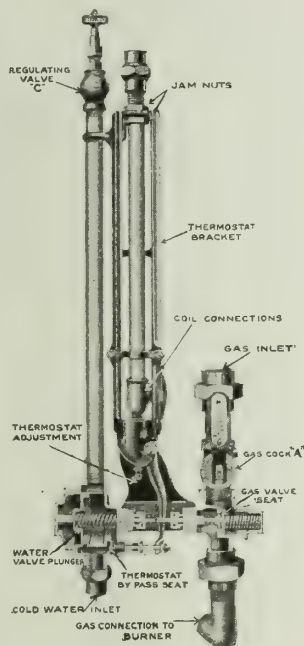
HOFFMAN THERMOSTATIC VALVE
